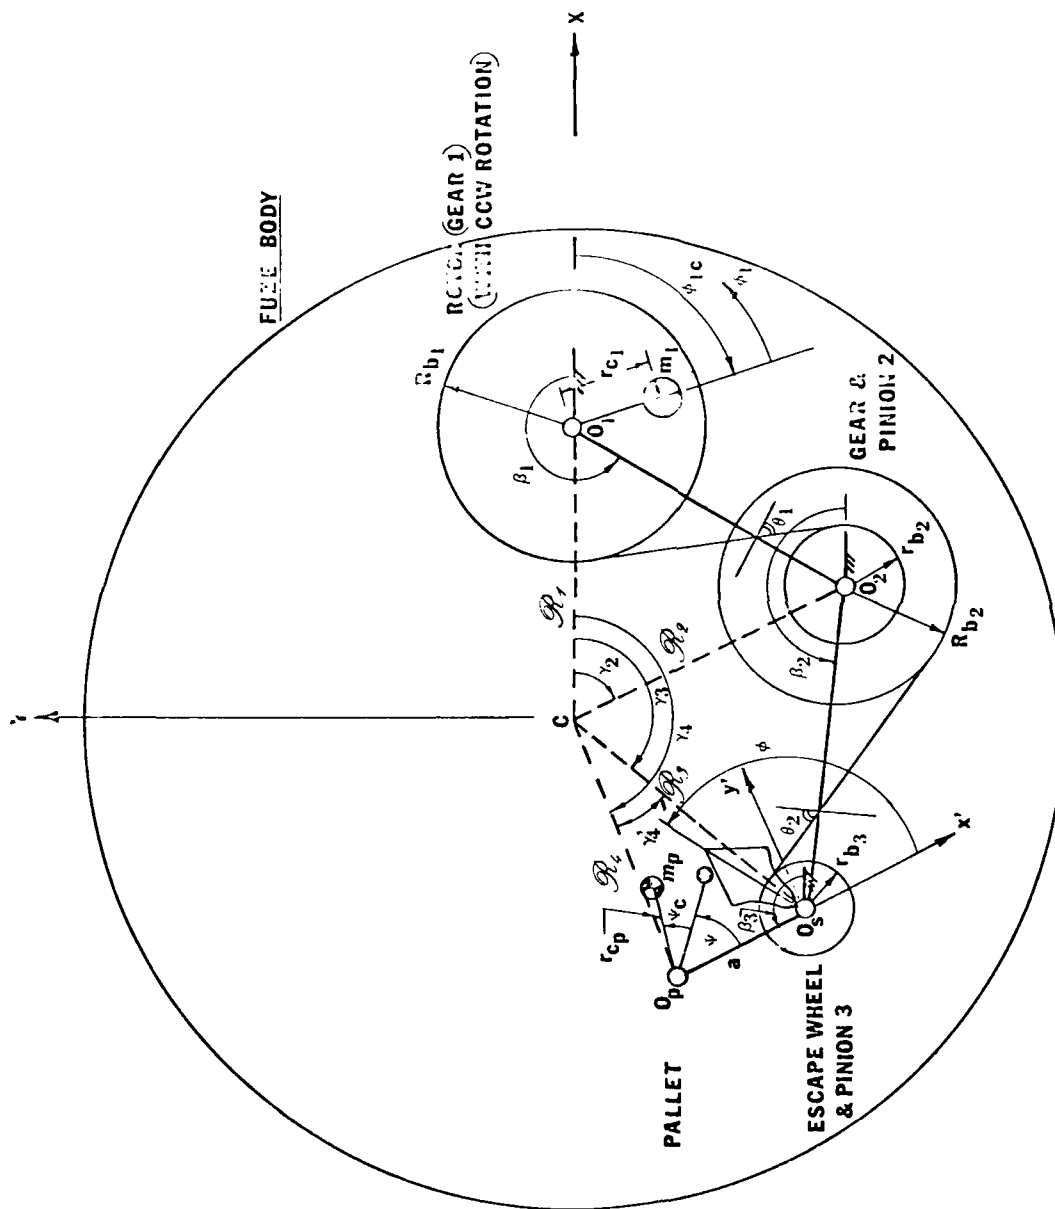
Rotor driven S&A device with two pass step-up gear train configuration no. 2
